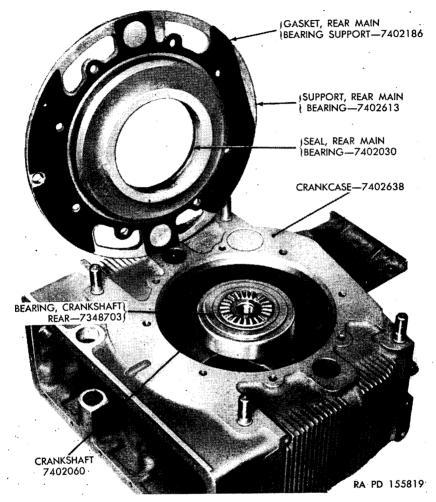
Crankshaft rear bearing support and gasket ready for assembly to crankcase.
